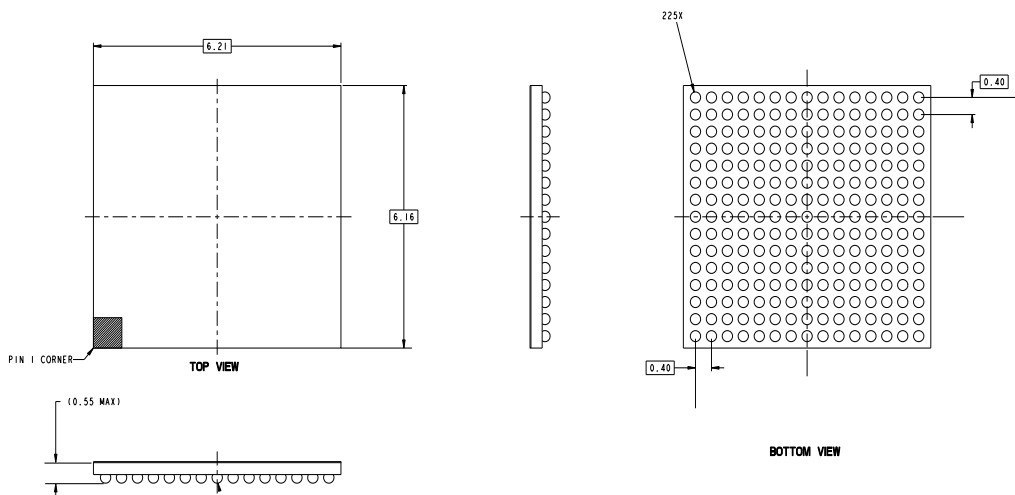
225 WLNSP (6.21 × 6.16 × 0.55 mm) package outline drawing
